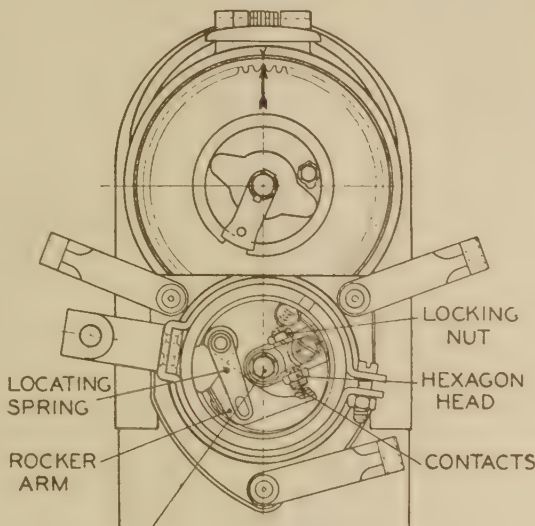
Showing detached Contact-breaker Unit and Method of removing the Rocker Arm for cleaning the Contacts.
